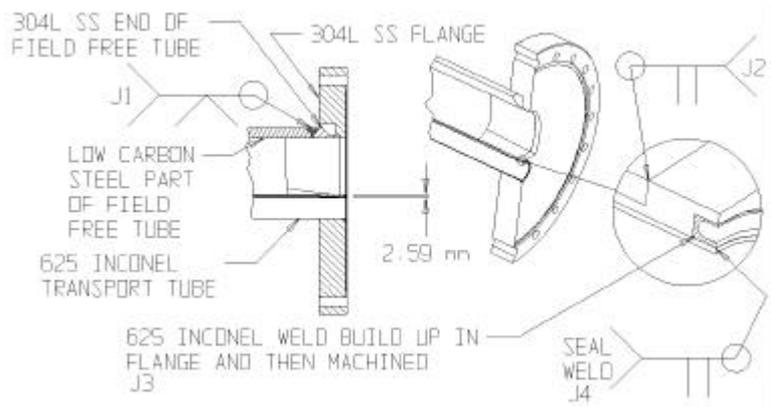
Cutaway views of the synchrotron extraction septum tube welds.
